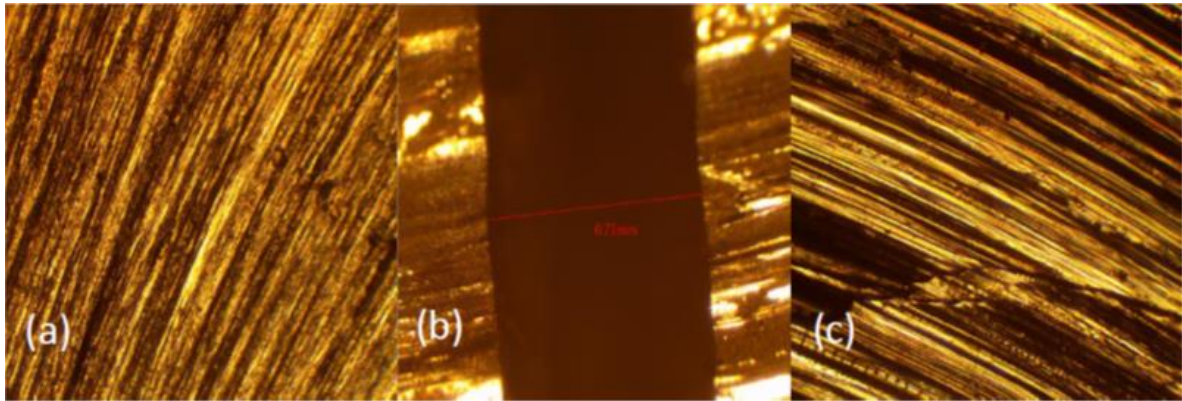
Rotational speed of 400 rpm: (a) Mg side of the weld; (b) 0.71 mm crack in SZ; (c) Al side of the weld
